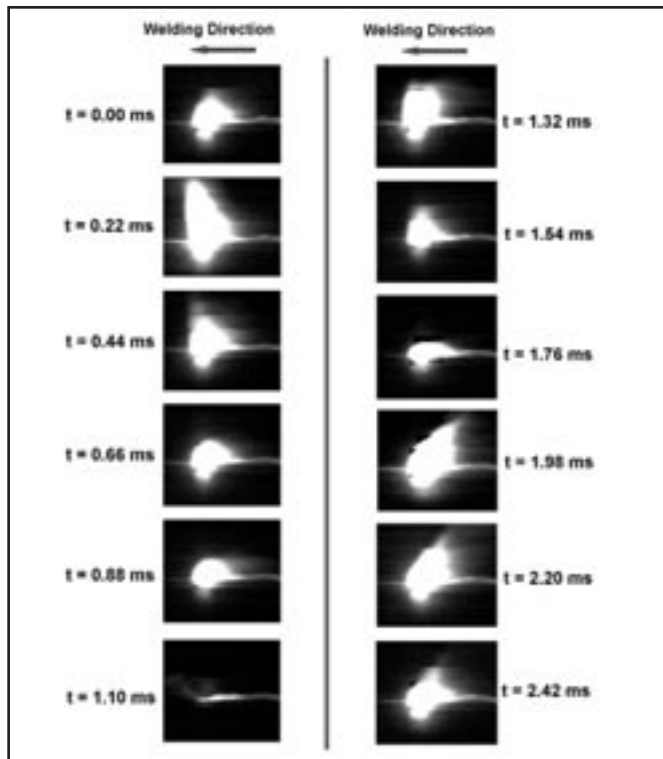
Size of vapor plumes dramatically changed in single-beam laser welding (1045 steel, bead on plate, CO₂ laser, 6 kW, 1.25 m/min, helium).
